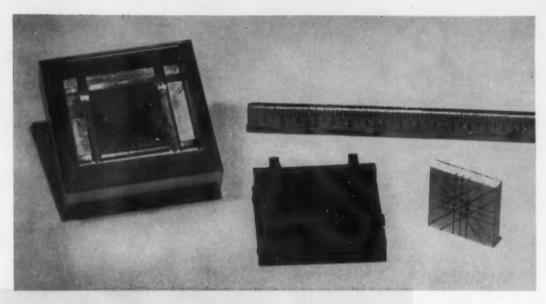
Master pattern (left) was used to make the mold for the wire inserting fixture (right). Extreme precision was required in making the mold to assure complete filling of the grooves in the master pattern.
